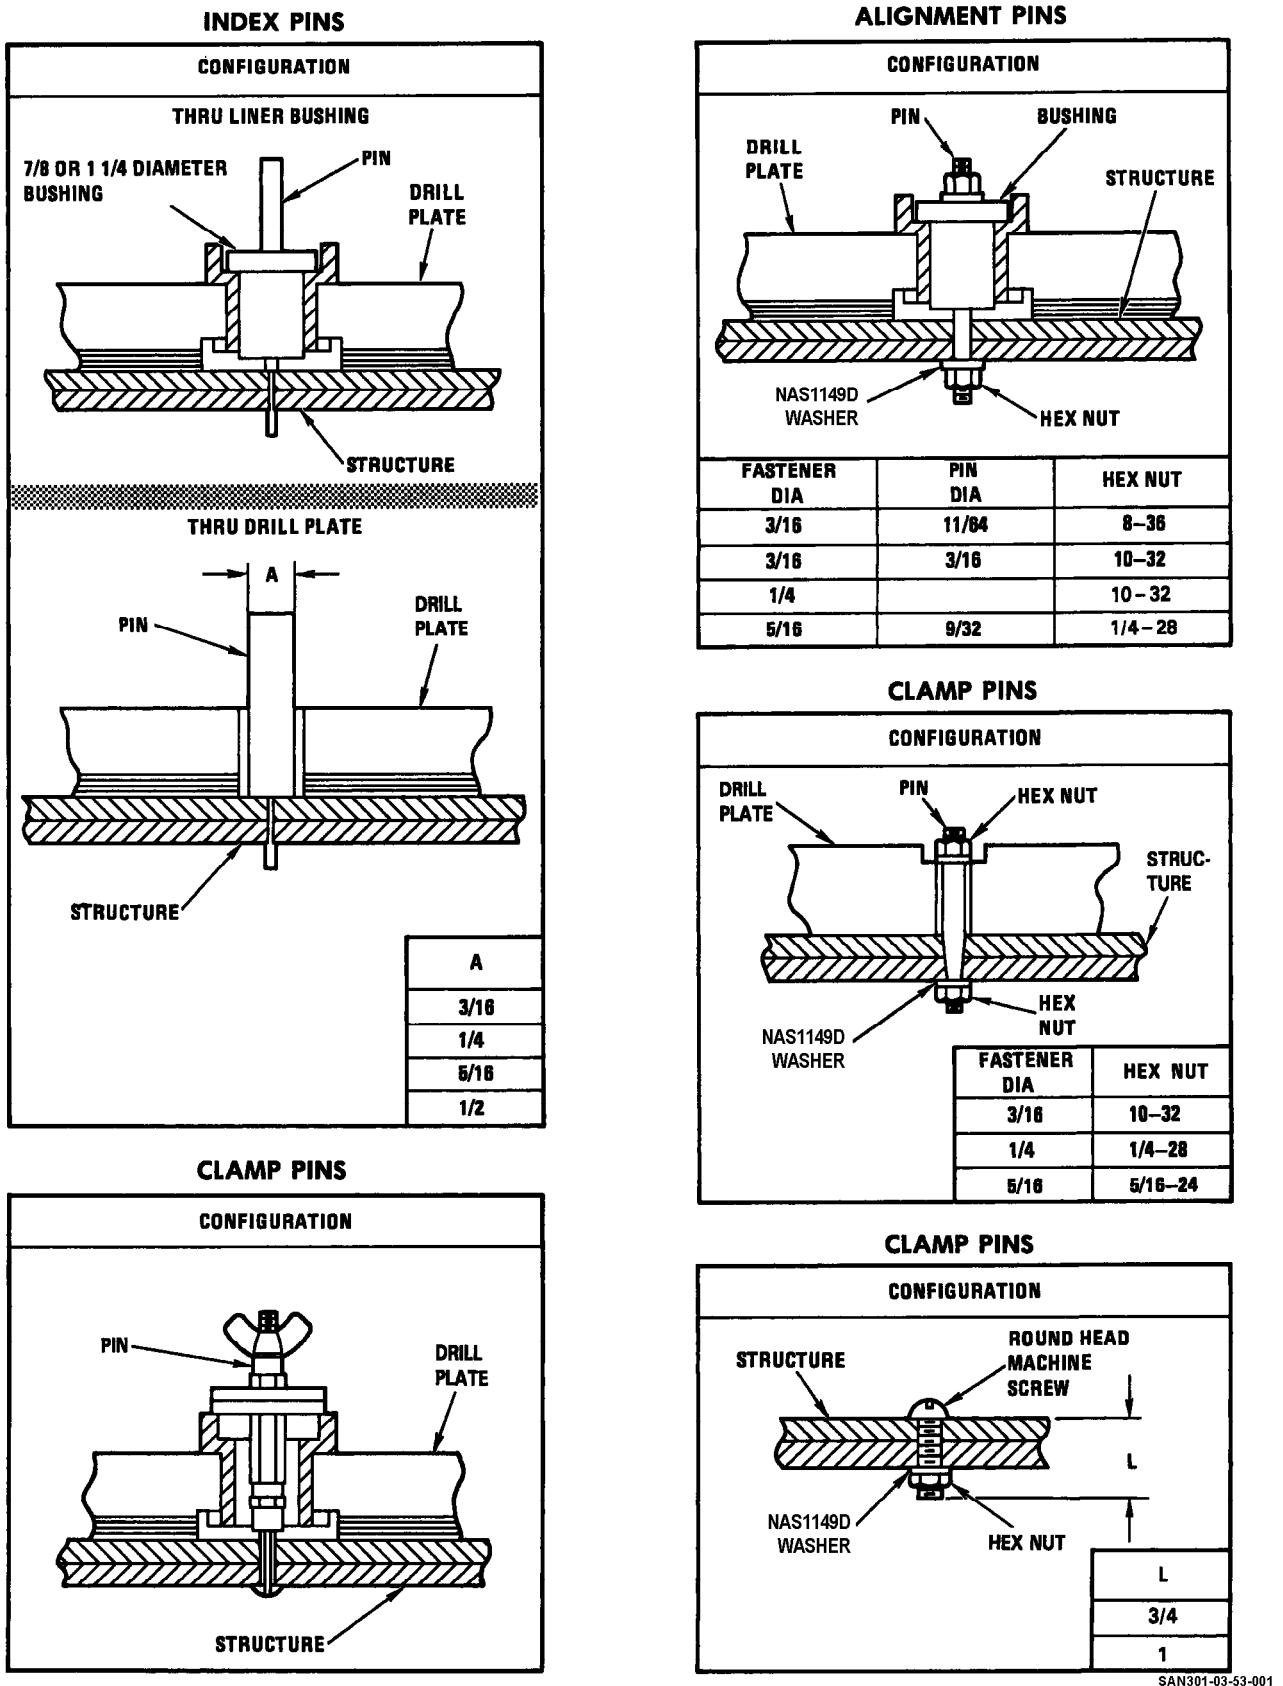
Taper-Lok Index Clamp and Alignment Pins for Straight Holes
